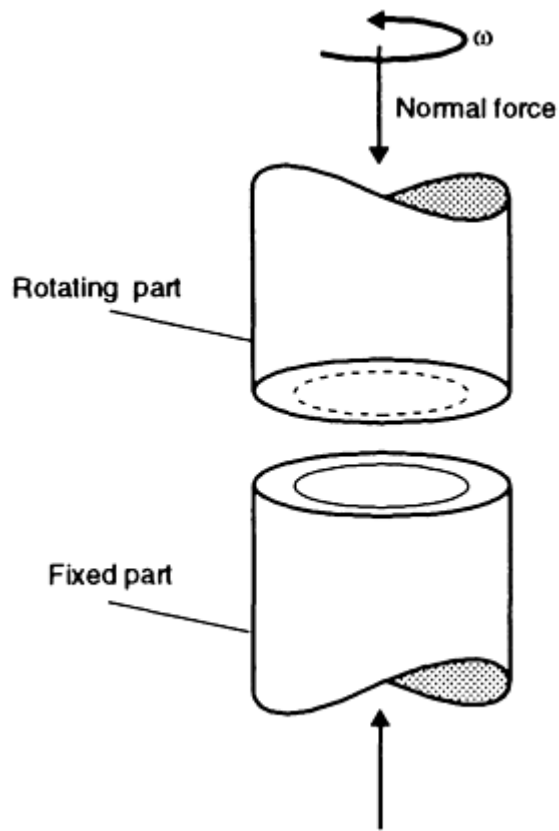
SCHEMATIC OF SPIN WELDING PROCESS
